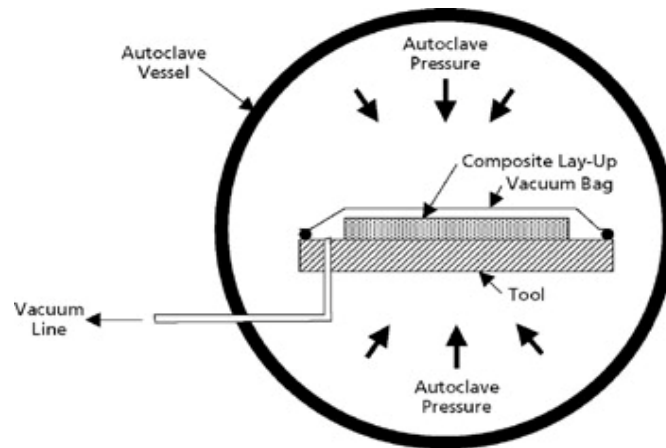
Sketch of a vacuum bag moulding composite being cured inside an autoclave [11]
